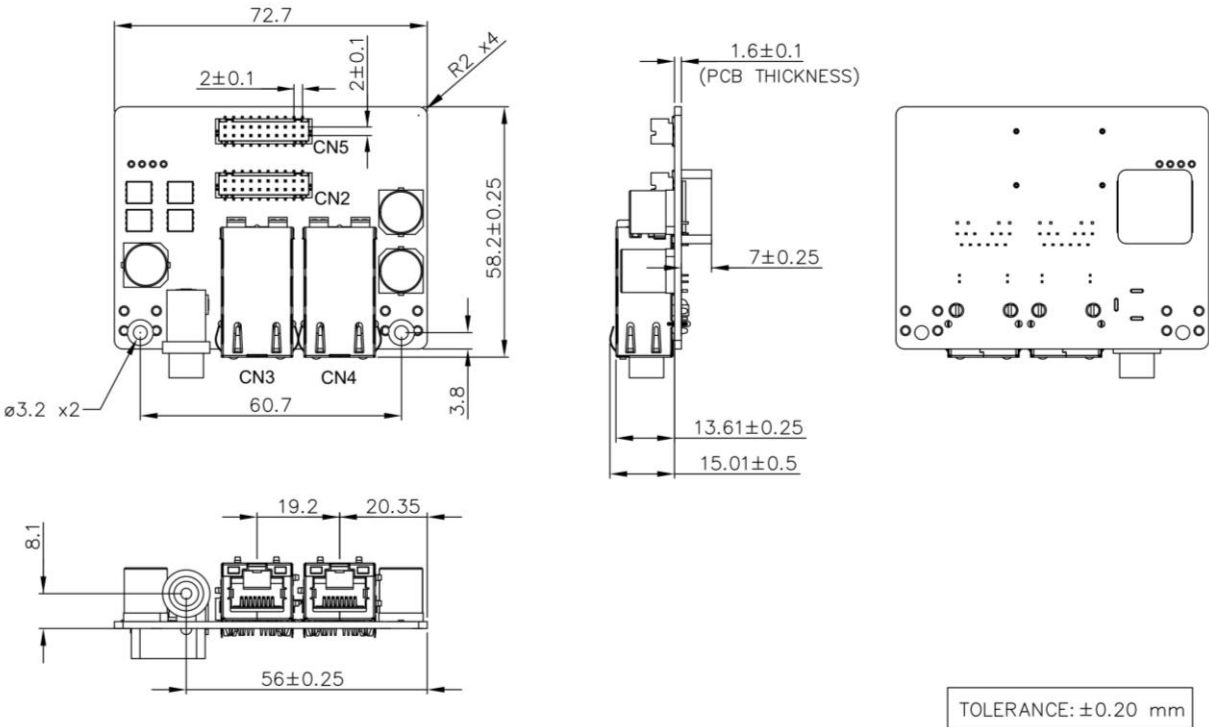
Bracket Daughter Board Drawing – DC Jack (EGPL-G2P1-C4/W4)
